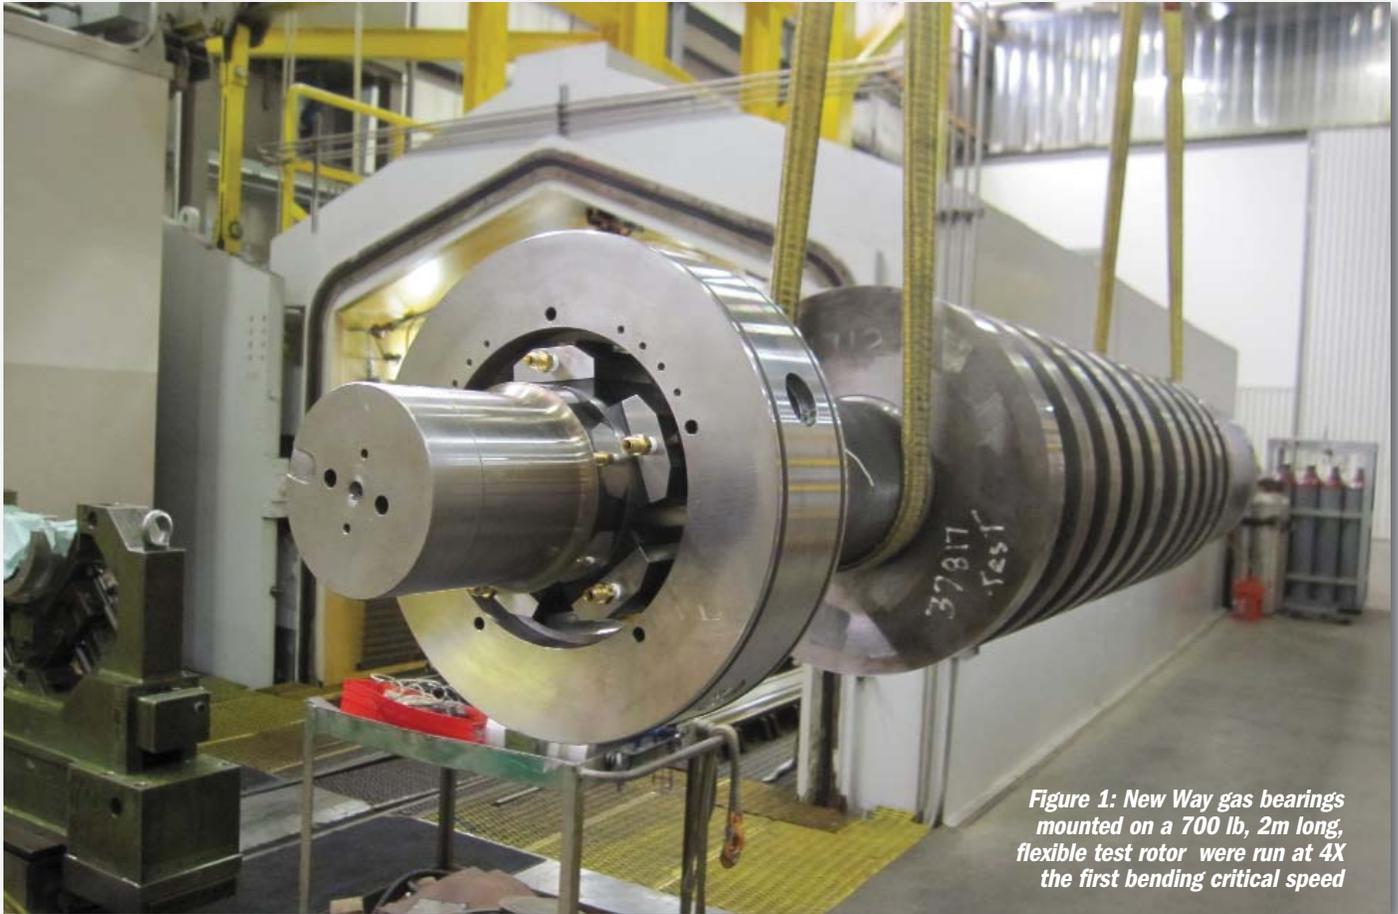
New Way gas bearings mounted on a 700 lb, 2m long, flexible test rotor were run at 4X the first bending critical speed
